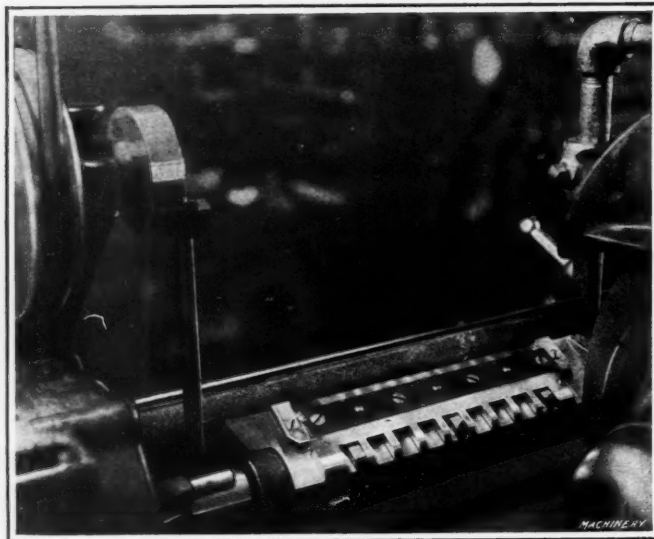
Grinding Corner of Piece on Cylindrical Grinding Machine
